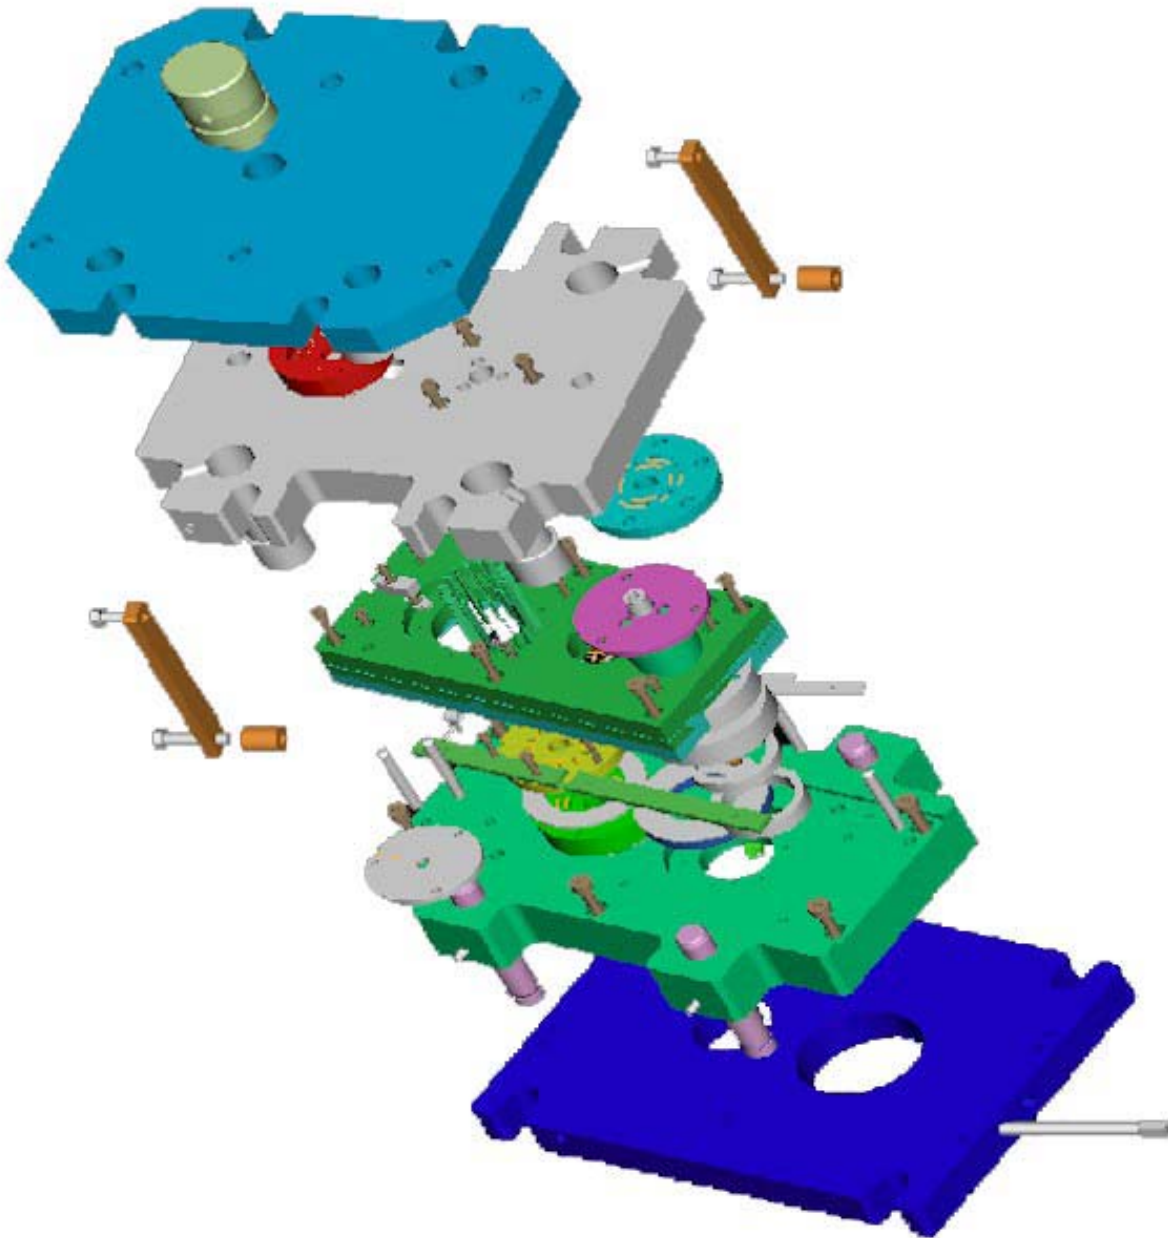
The Exploded View of the Lamination Press Tool. This assembly contains around 90 parts that driven by 10 dimensions that the user specifies.
